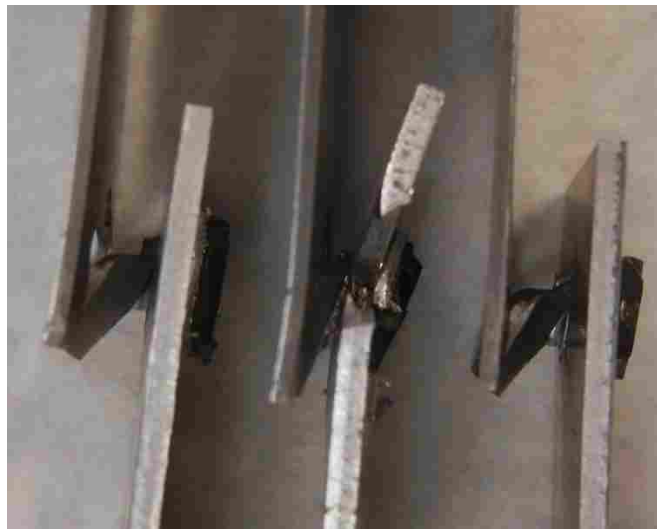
5-5kN Fatigue Samples with Nugget Pullout Failure
